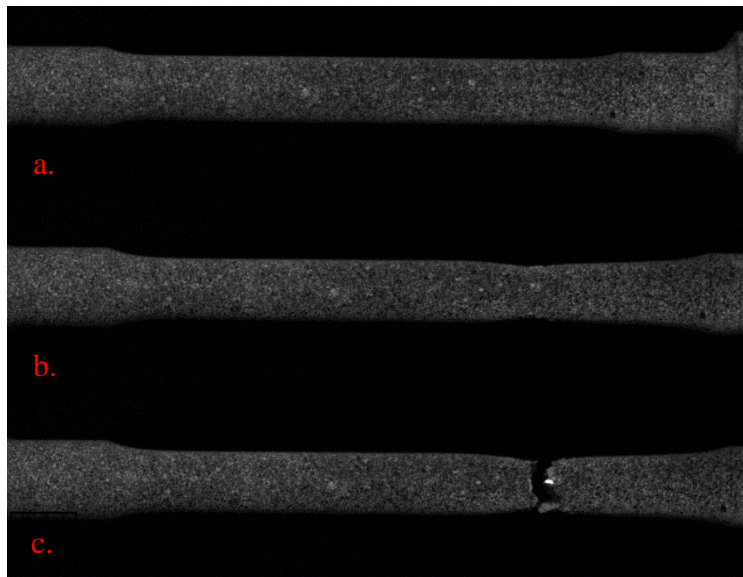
A6061-RAM2 tensile test images showing; a. specimen pre-strain, b. specimen at 16% elongation before fracture, exhibiting necking, c. specimen showing ductile fracture with signature cup-and-cone fracture surfaces.
